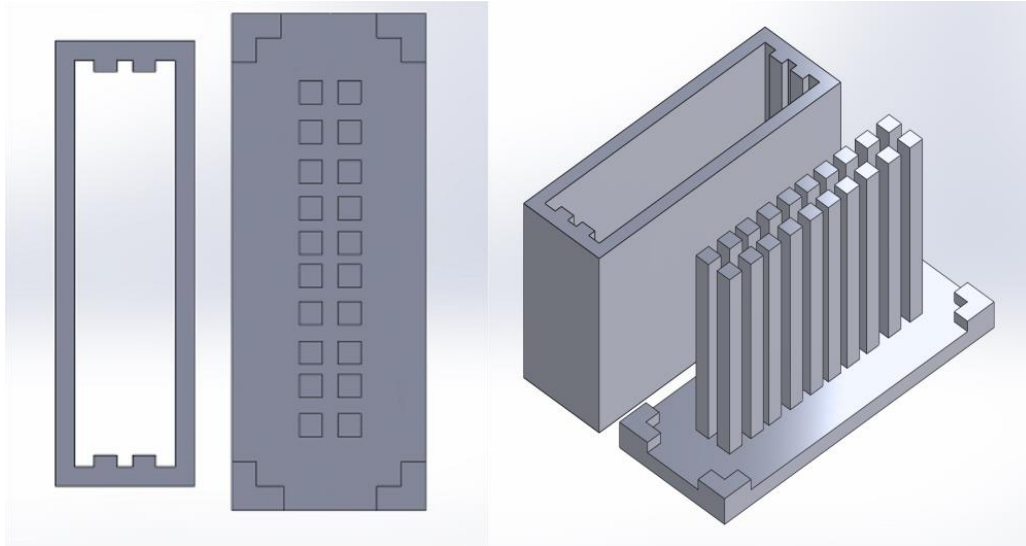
SOLIDWORKS mold with shell (left) and base (right) in both top and isometric views for rand-var-03
